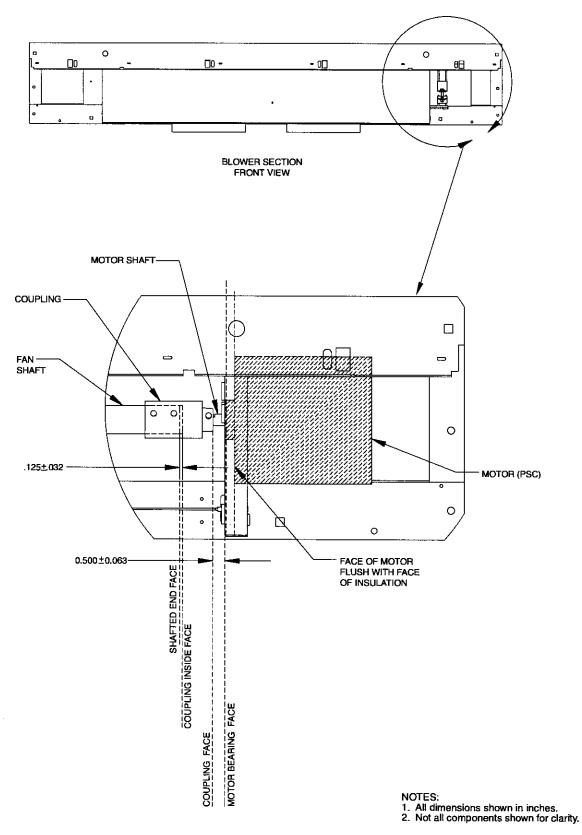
40UV,UH Ventilator Blower Section Assembly --- PSC Motor Detail
